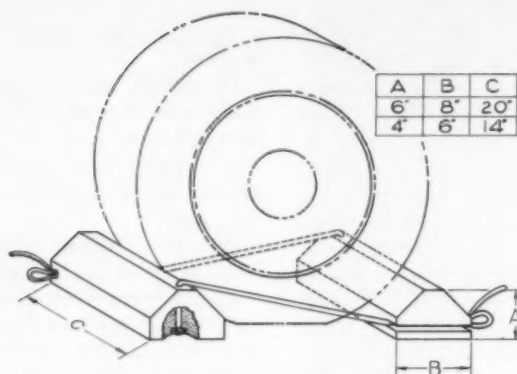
USAF basic drawing for PN 42D6594 local manufacture wood chocks.
